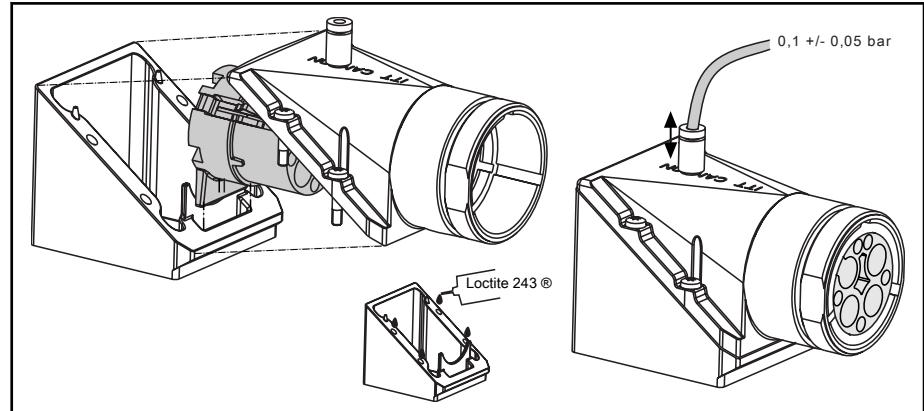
Assembly SUP-M02-MSK on RLS1300
